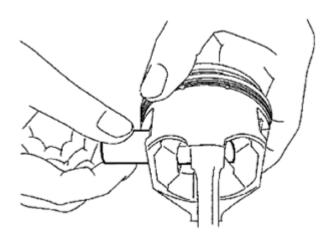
Removing Piston Pin From Connecting Rod Courtesy of SUZUKI OF AMERICA CORP.
